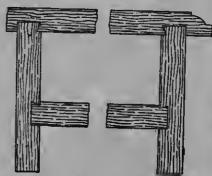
Framing of Dressing-cheet's Jewel Drawer Casing.
